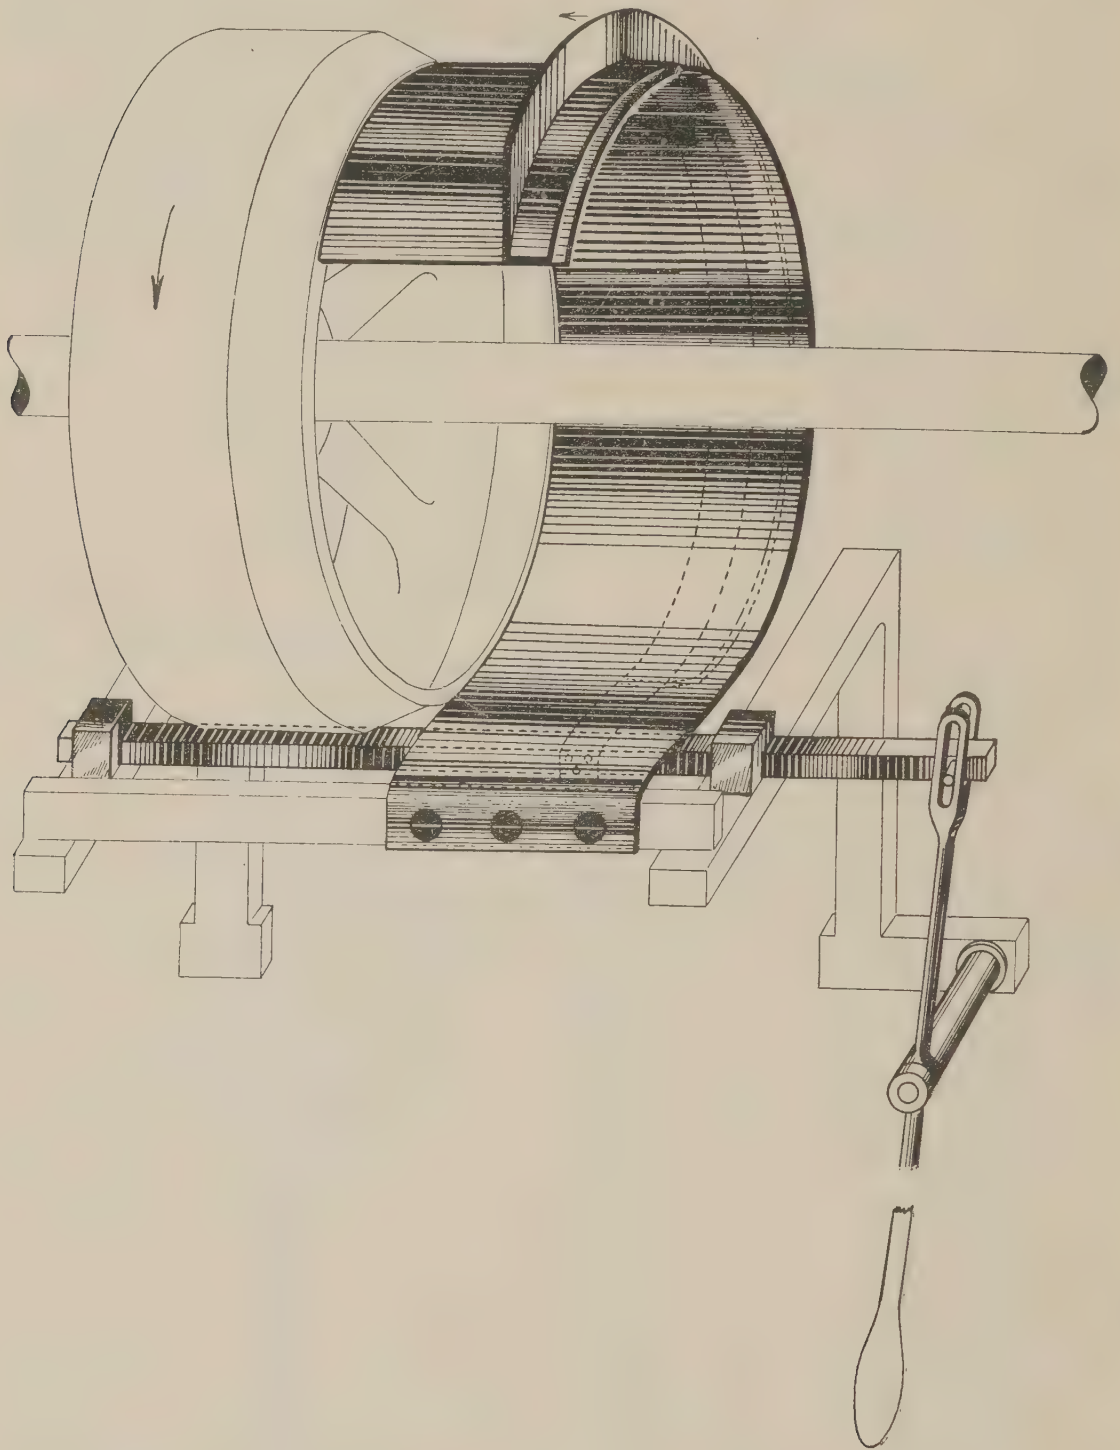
BELT MOUNTER WITH MOUNTING SLIDE (German design).
